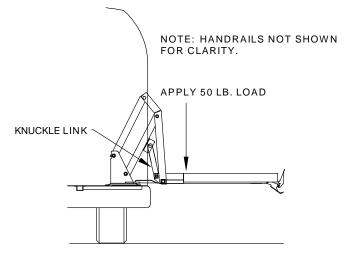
PRESSURE SWITCH TEST AT FLOOR LEVEL
